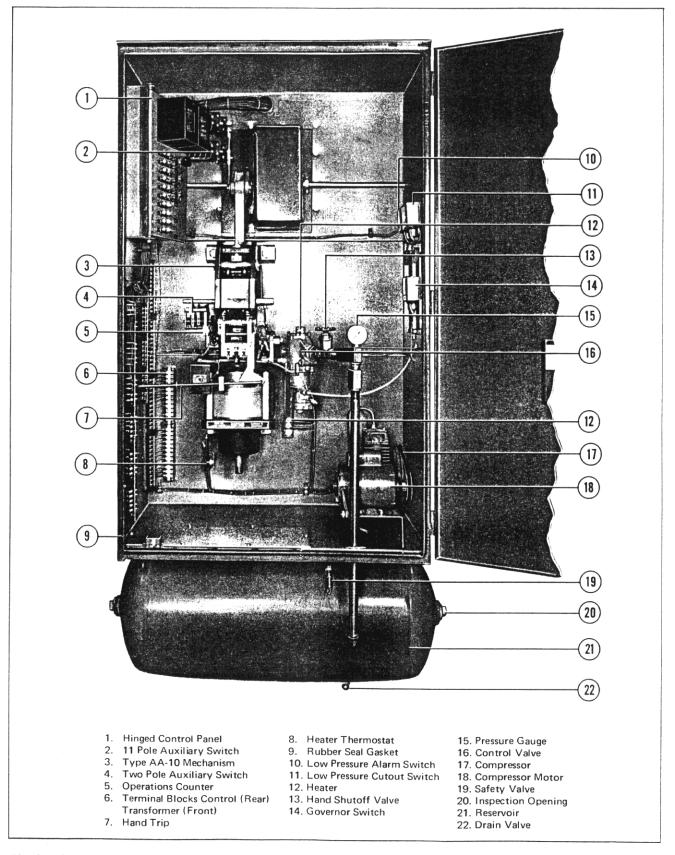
AA-10 Mechanism as used on the 1150GM 5000 Oil Circuit Breaker
